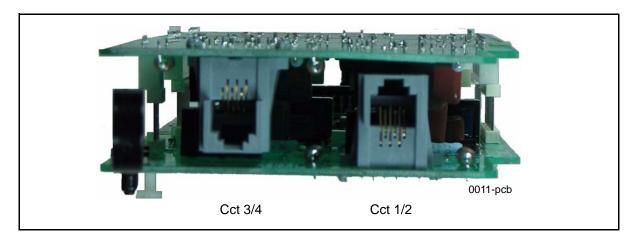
GCOCIH with CCOCIS PCB Assembly
